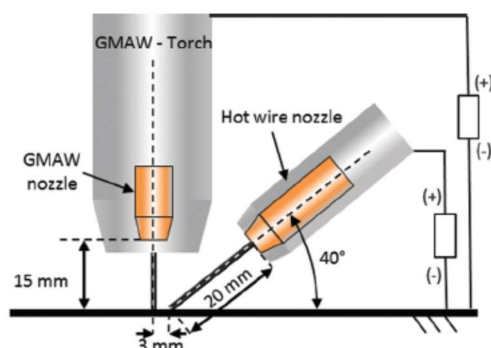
Hot wire-assisted gas metal arc welding [43].
